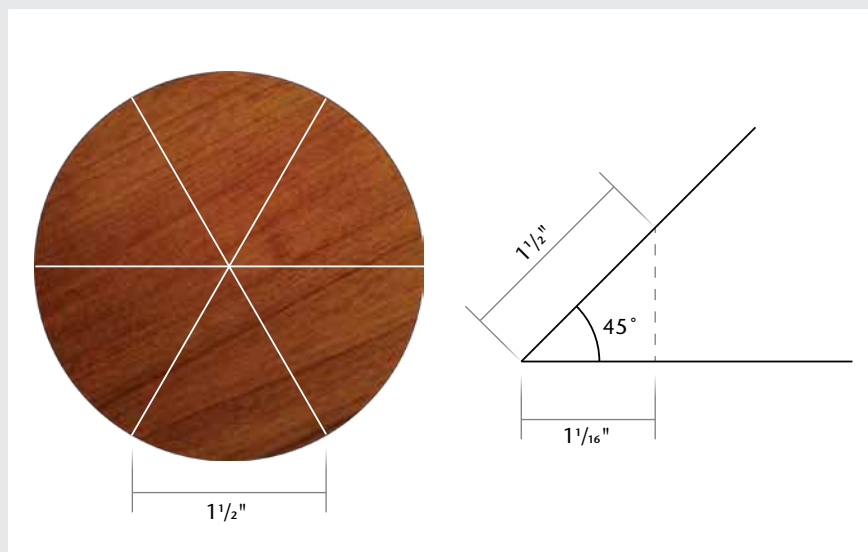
Set the compass to the radius of the workpiece and divide the blank into six equal segments, as shown at left. Since the blank is held at 45° in the jig, mark the segment width on a 45° line to find the true width of cut – in this case,  $1\frac{1}{16}$ ".
